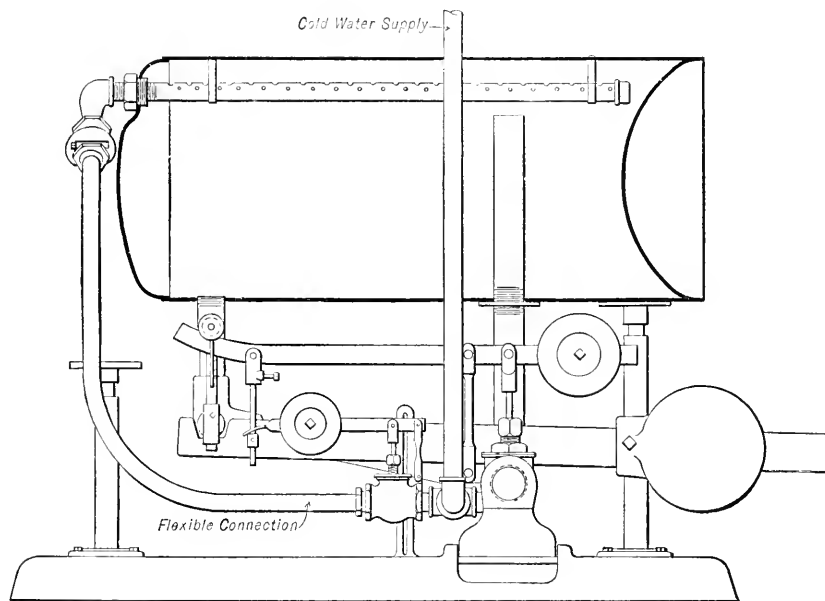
MOREHEAD TILTING CONDENSER TRAP.
